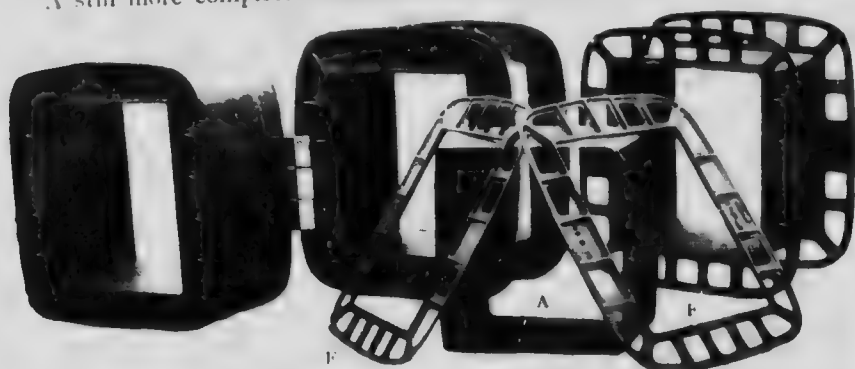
Magnetising Coils used by Messrs. Dick, Kerr and Co.
